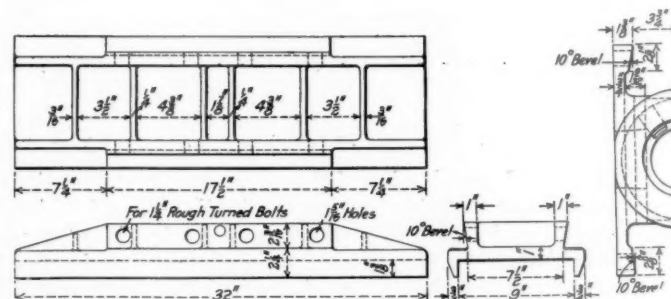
Shoe Fastening as Applied to Crosshead with Piston Rod Held by a Key
